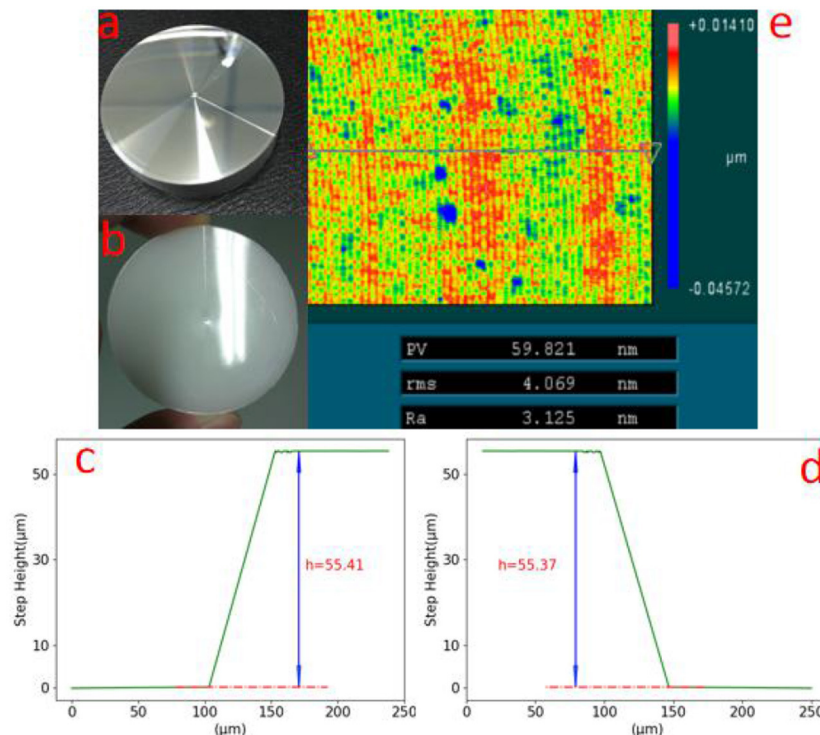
| (a) Is the picture of tool's wear after cutting aluminum; (b) is the picture of tool's wear after cutting PE material.
